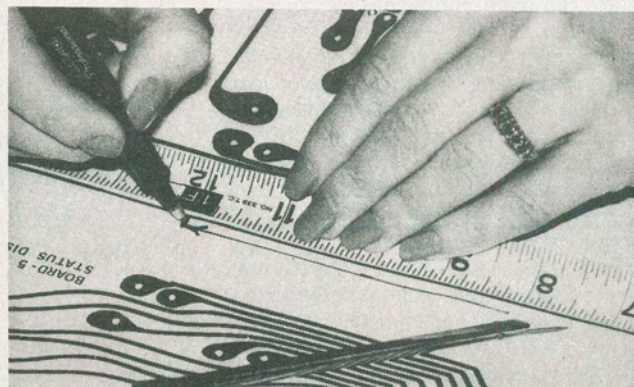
MARKING OFF a segment of the center line. That segment gives you a useful reference when you make your full-sized mask from your double-sized layout.
